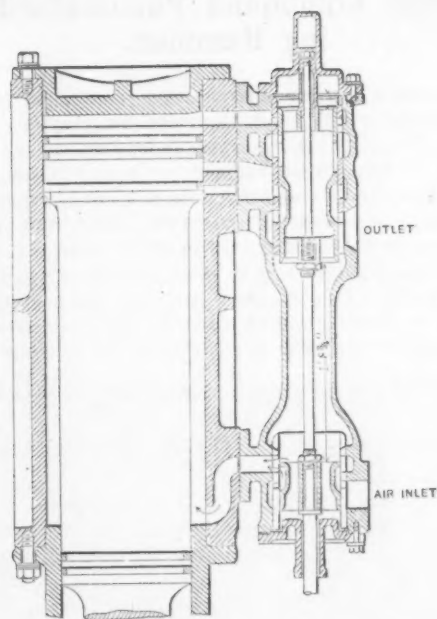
Section of a Valve Chest for a Large Hammer.
